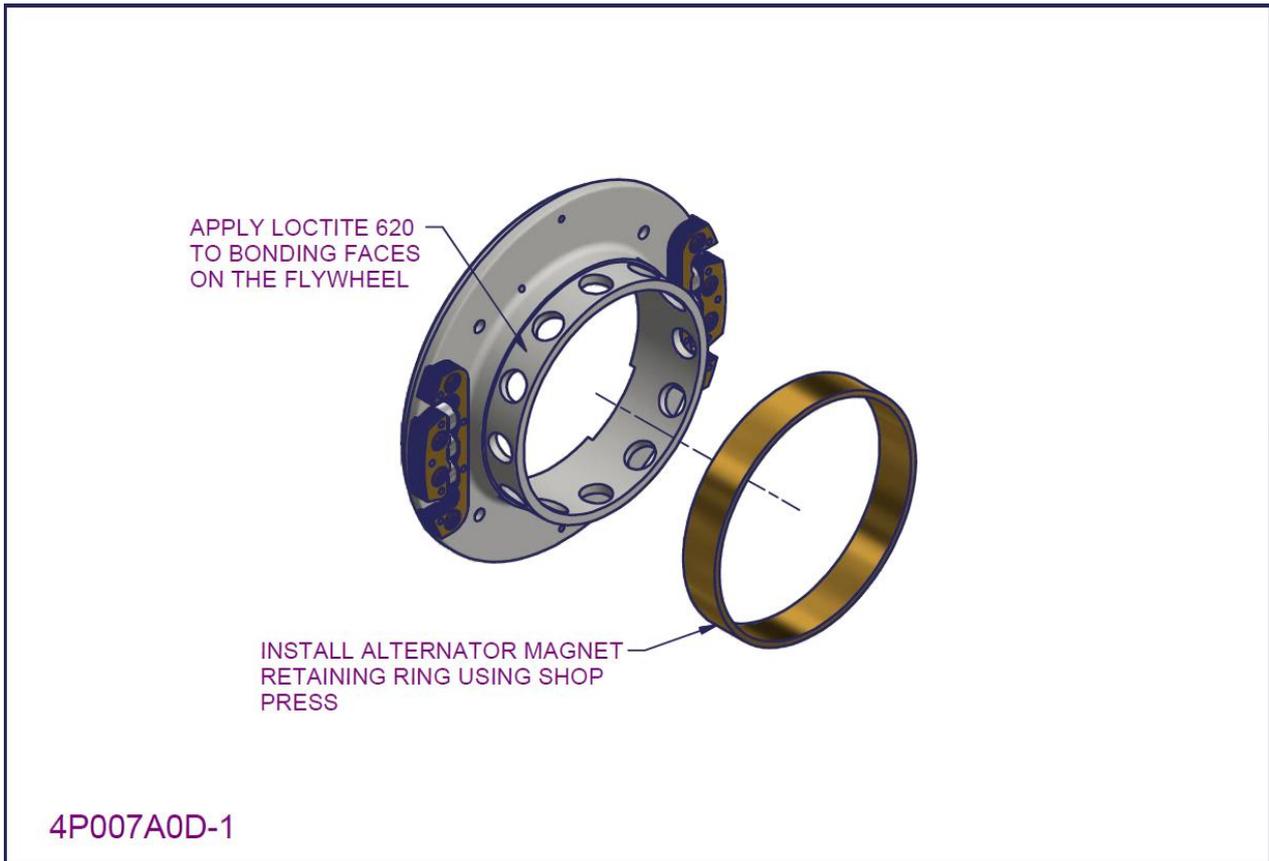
2200/3300 Flywheel subassembly (aluminium cross piece) 2
